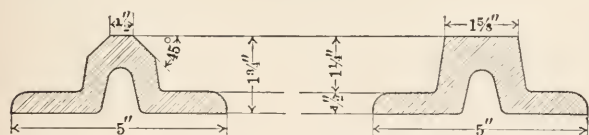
Cross-section of the Rails for a Sawmill Carriage.
